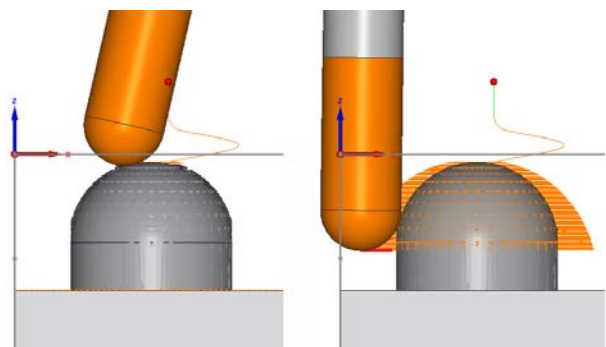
The tool position at the top and bottom of the workpiece during machining simulation
